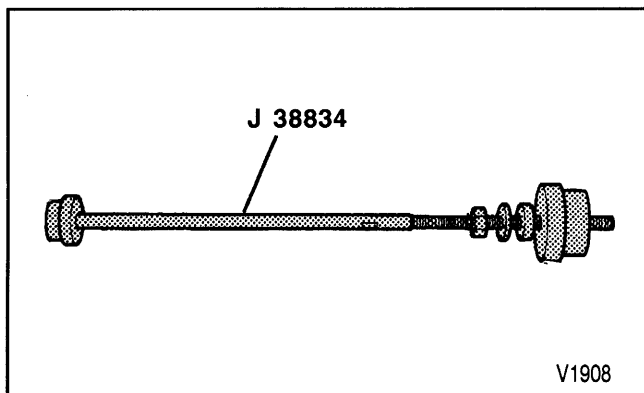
J 38834 Positioned to Install Balance Shaft Rear Bearing
